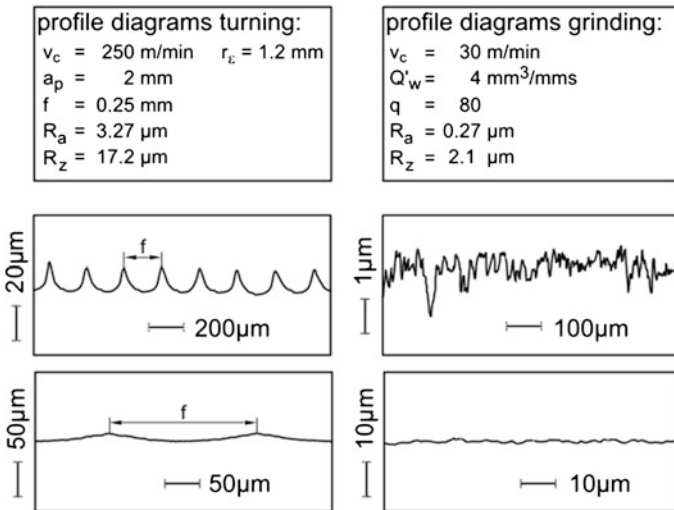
Workpiece profile diagrams for turning and grinding
